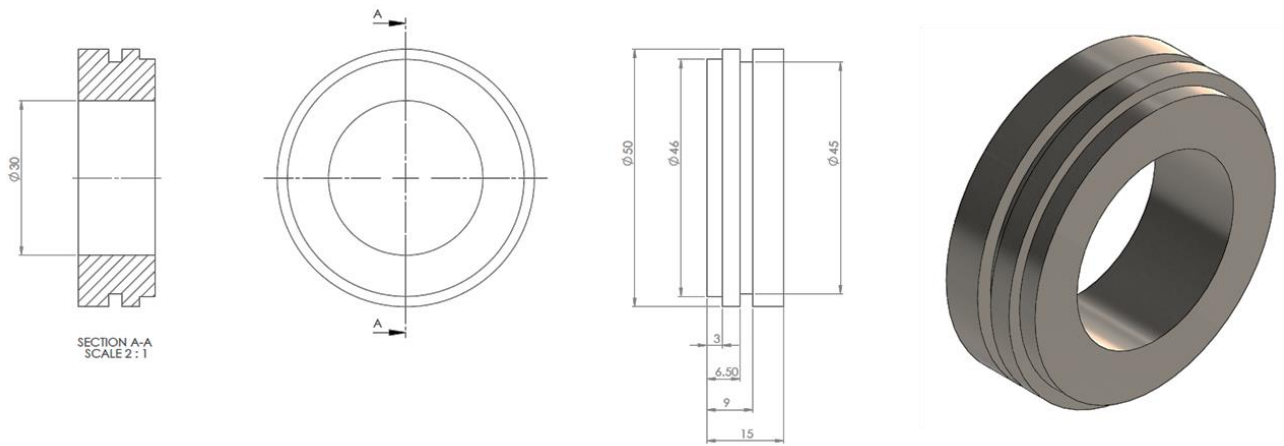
Mechanical seal design. 2D technical drawing (left); 3D model (right).
